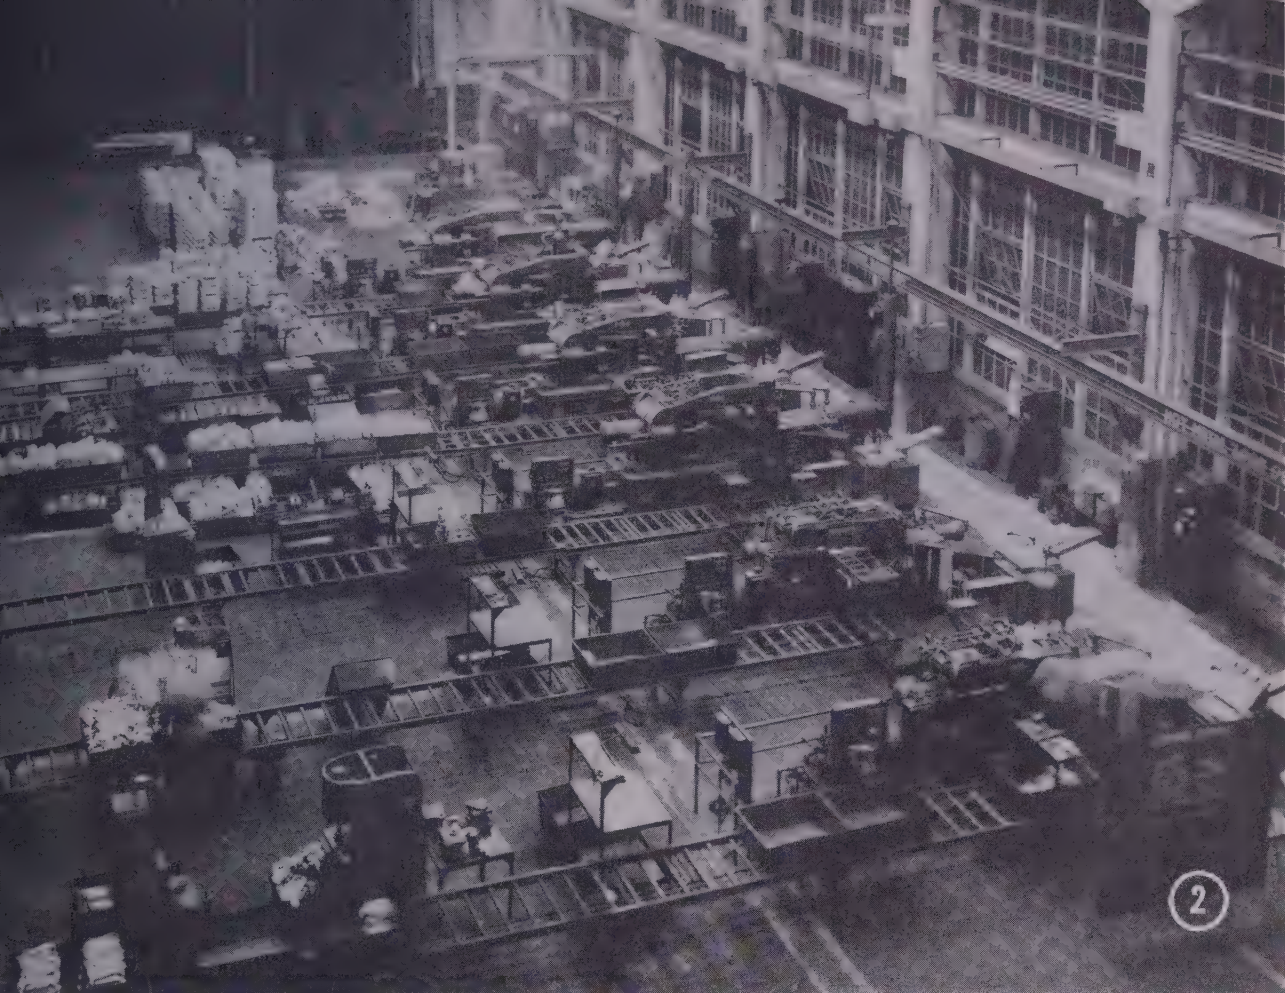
General view of the die casting department looking toward the melting furnaces at far right next to the metal storage area which is adjacent to the unloading dock and siding
